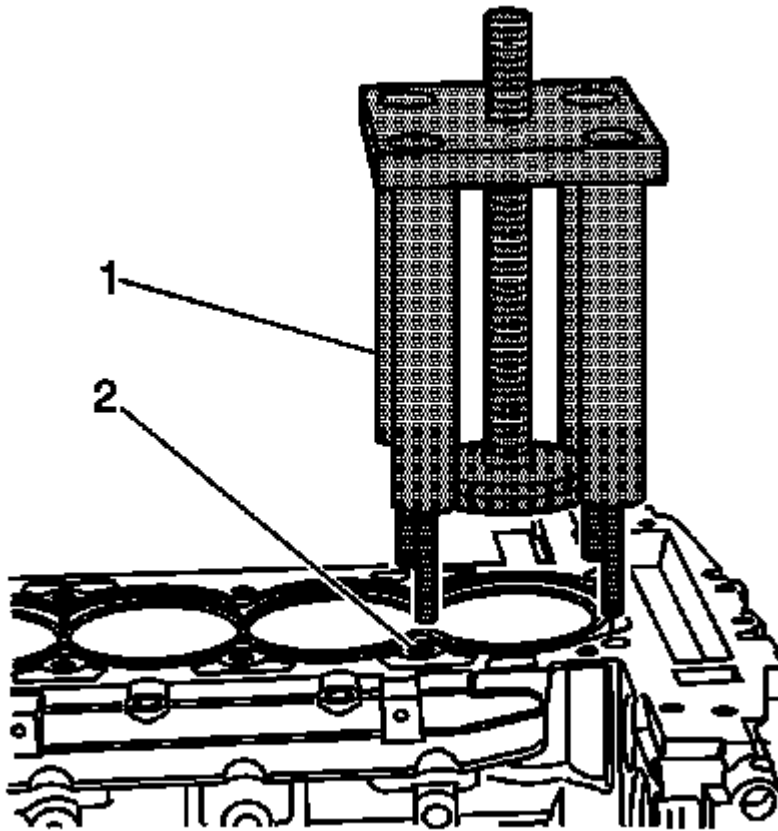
Cylinder Bore Sleeve Installer Removal from Cylinder Block
